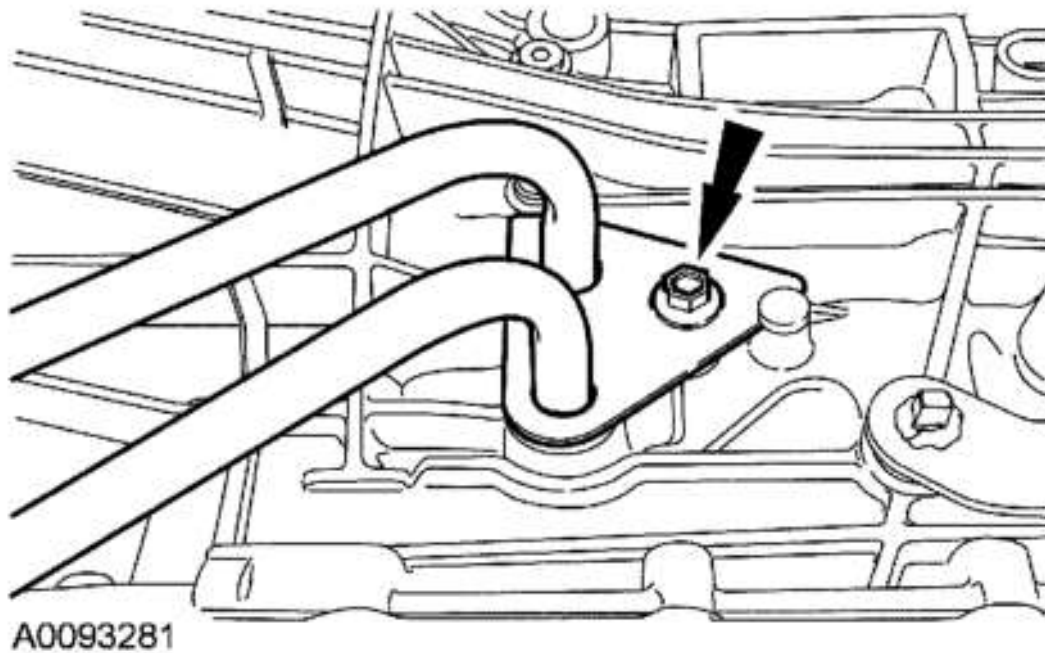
Removing Transmission Cooler Tube Bracket Bolt
